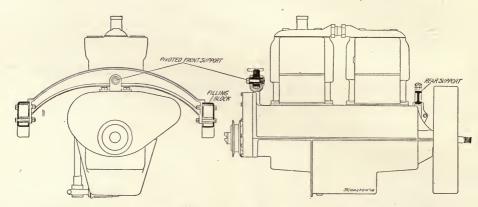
A Three-Point Main Frame Mounting Employed on the Riker Trucks.
